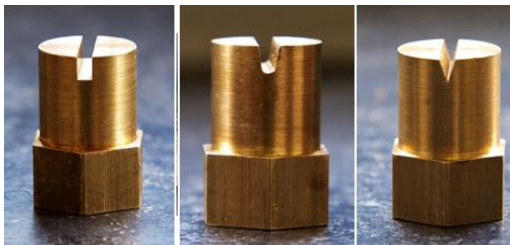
0° Specimen, 17° Specimen, 34° Specimen
